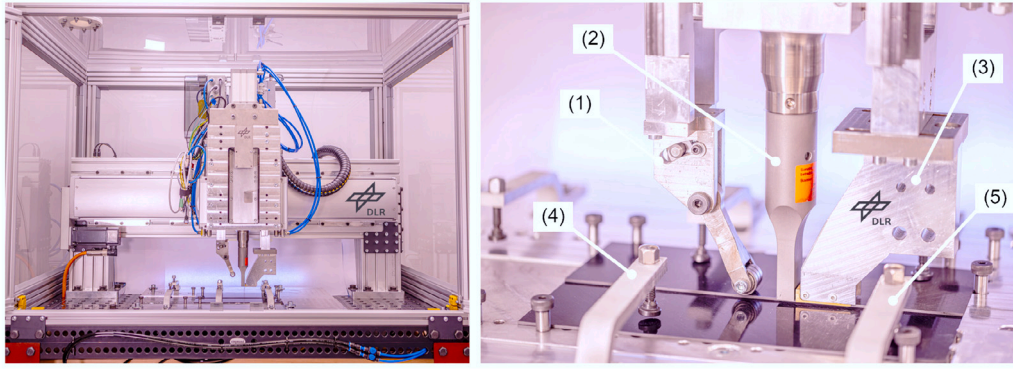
Continuous ultrasonic welding bench (left), welding setup on modular anvil (right).
